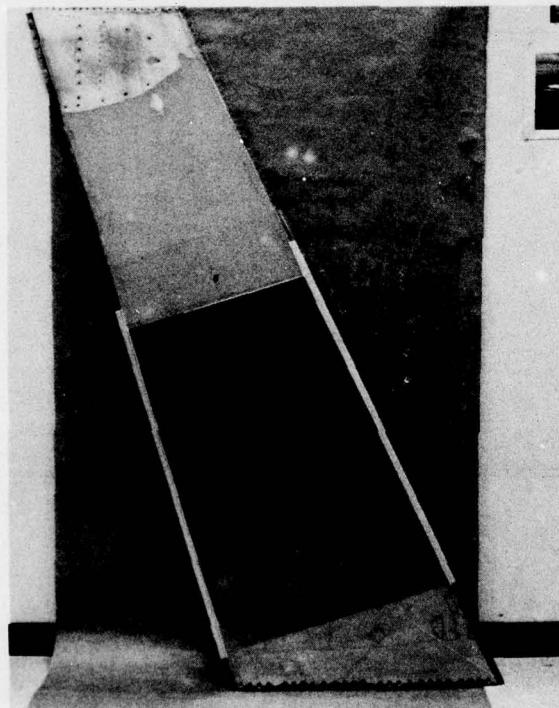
Metal Contour Sheet Placed Over the Panel to Provide a Surface for Molding the Fiberglass Bond Assembly Jig
